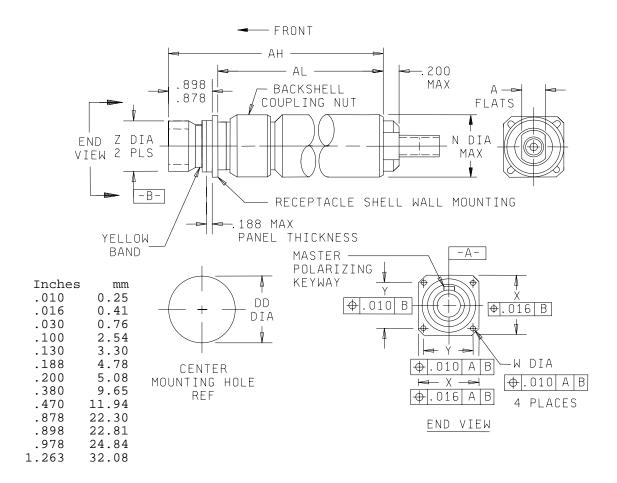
Wall mounting receptacle connector with short straight backshell.
